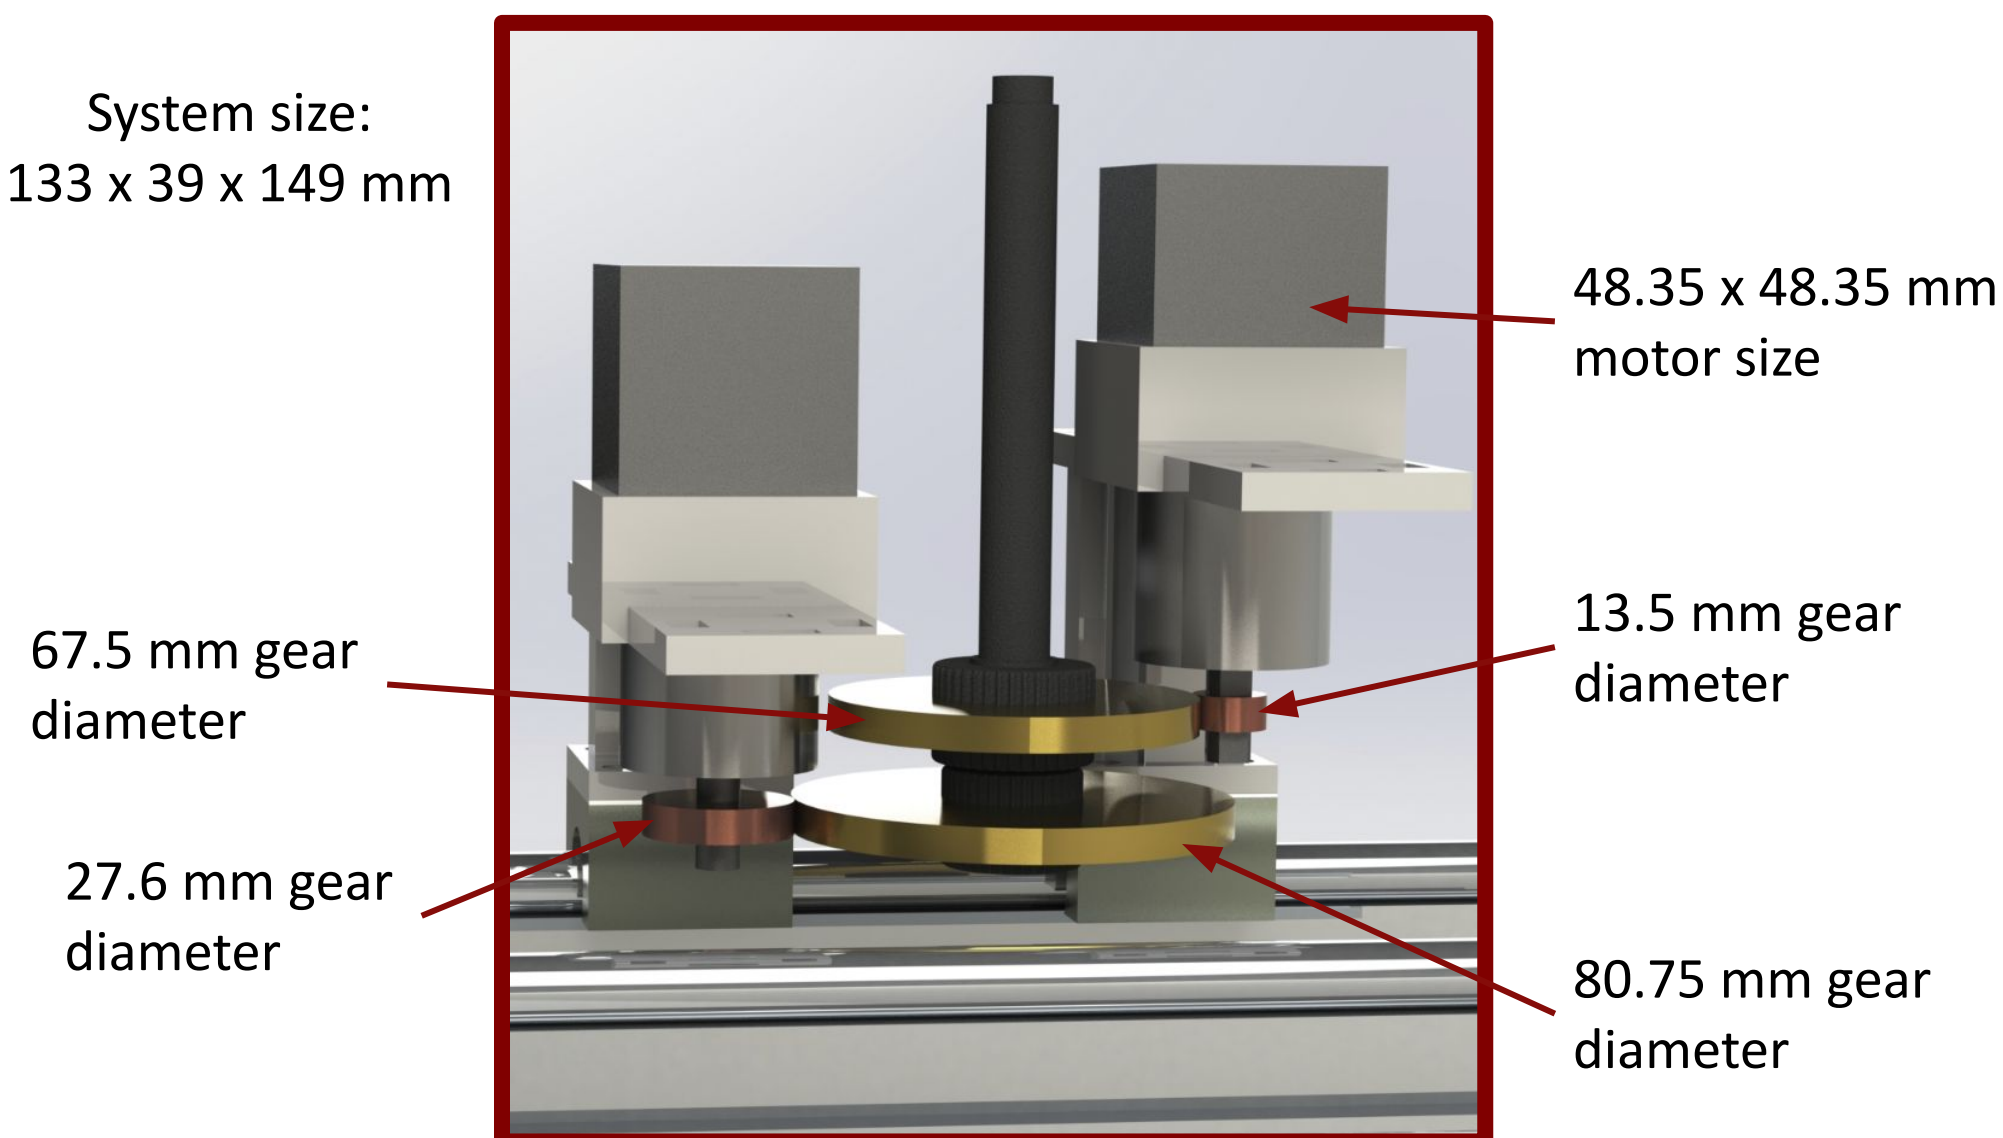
Final CAD Design Viewed Horizontal to Microscope
